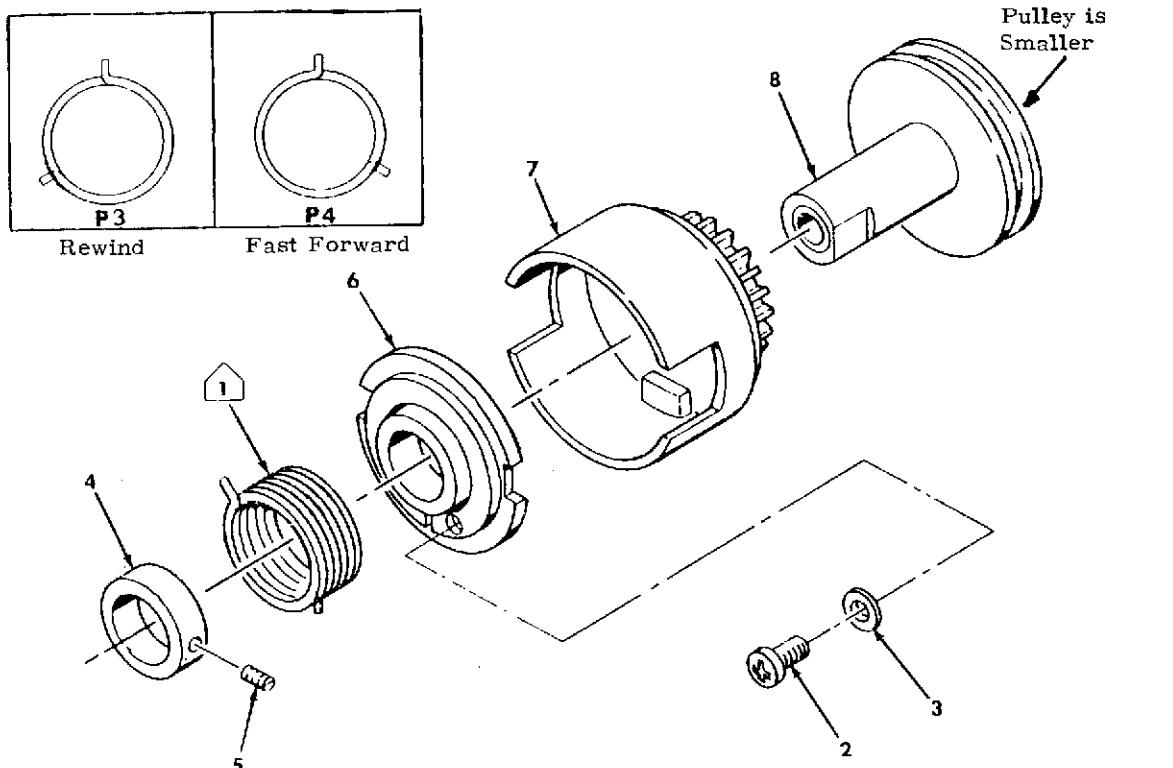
REWIND and FAST FORWARD CLUTCH REASSEMBLY
